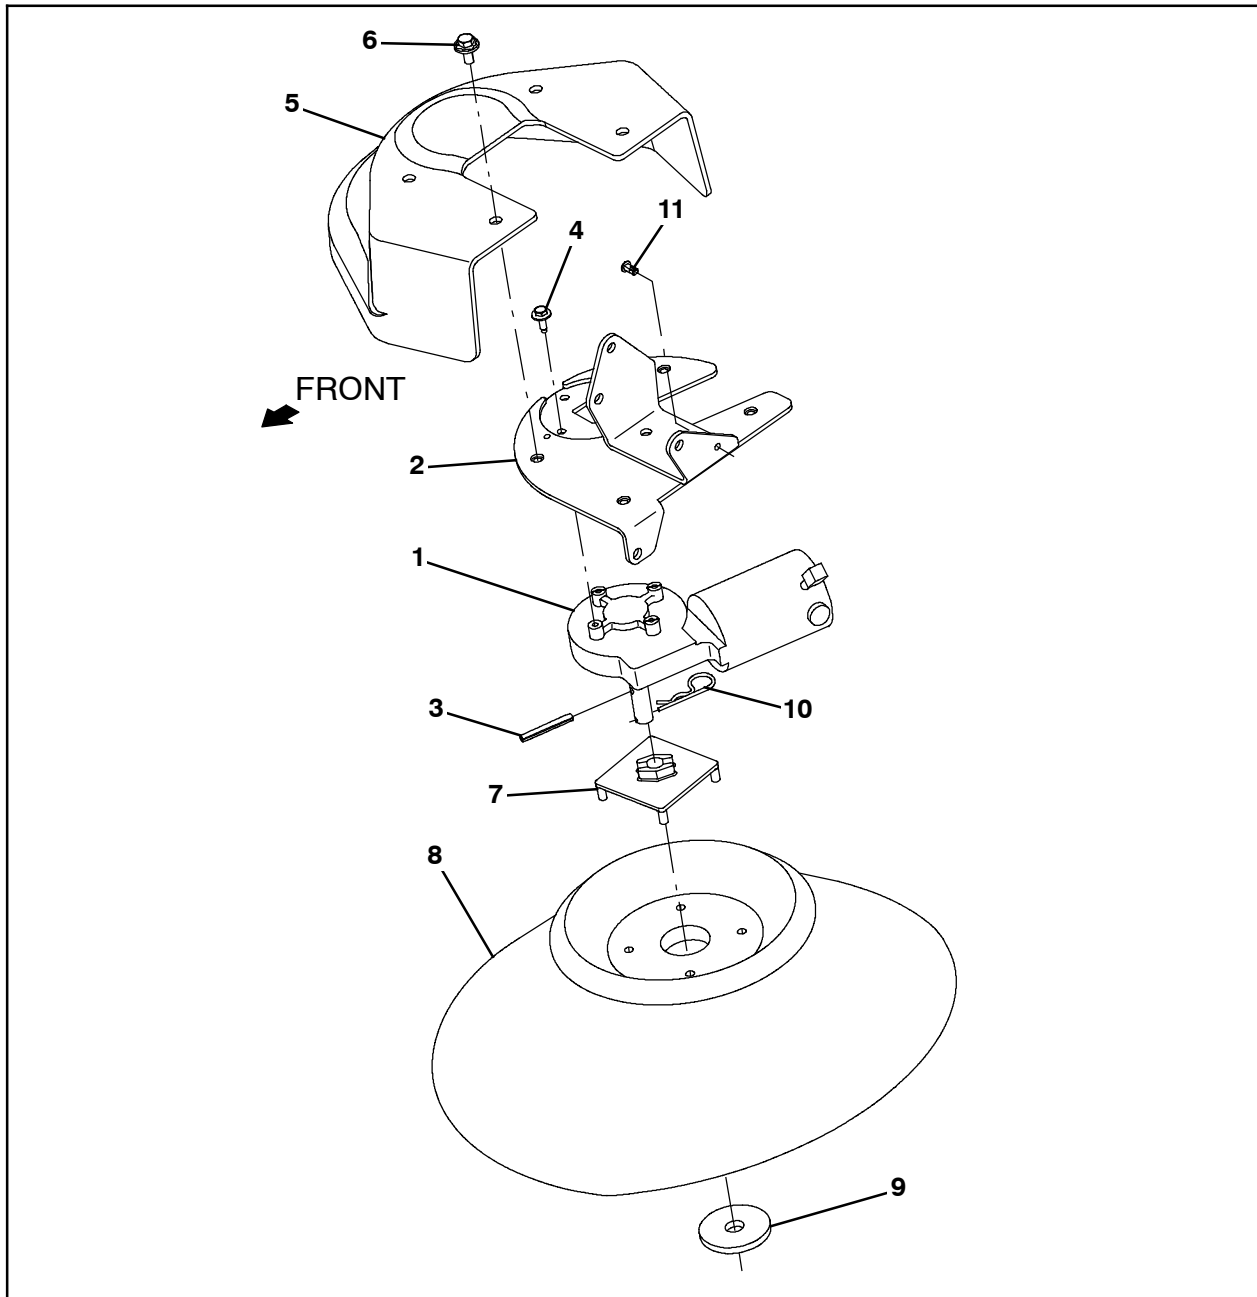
Sweeping Side Brush Drive Motor Group, Right Side
